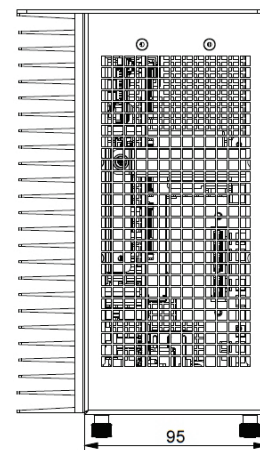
Dimensions: top side (KBox C-104-TGL-1)
